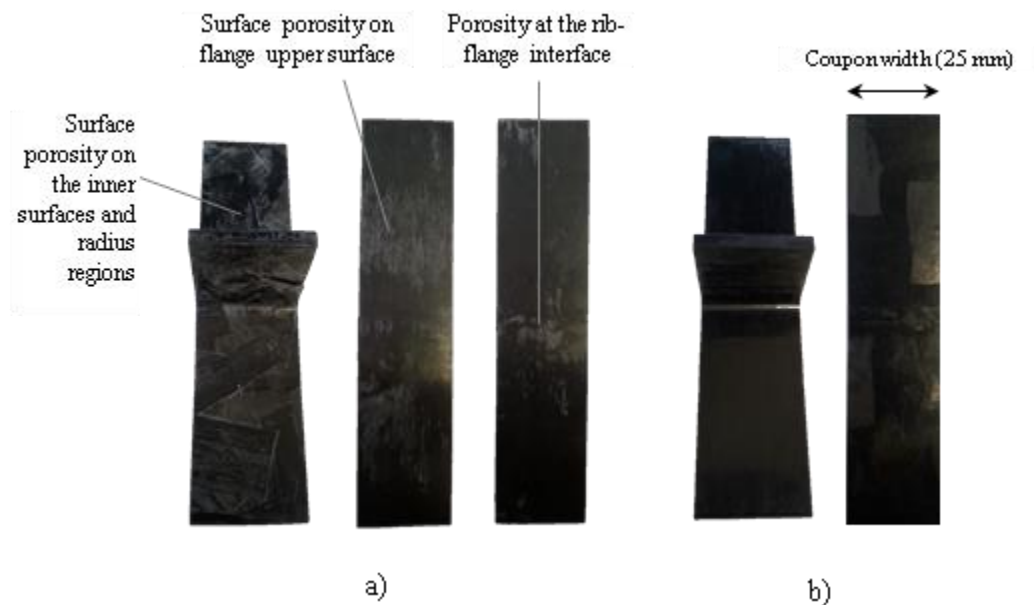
a) Surface porosity on the inner surfaces, radius regions and on the upper surfaces of the flange without preferential cooling strategy; b) Preferential cooling strategy minimizes the surface defects on radius region, the lower and upper surfaces of the flanges
